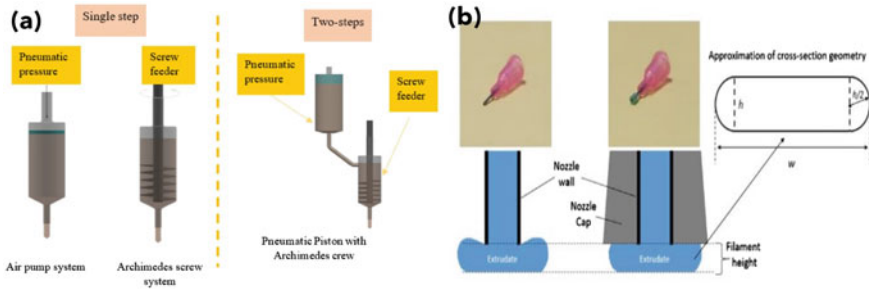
a Illustration of plunger input for the screw-based extrusion nozzle (Reproduced from [46]) and b nozzle without a nozzle cap or its equivalent (left) and with a nozzle cap (right) (Reproduced from [47])
